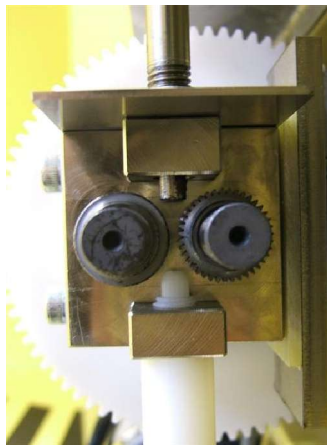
1 Drawing of Wire Feeder Assembly Overview
